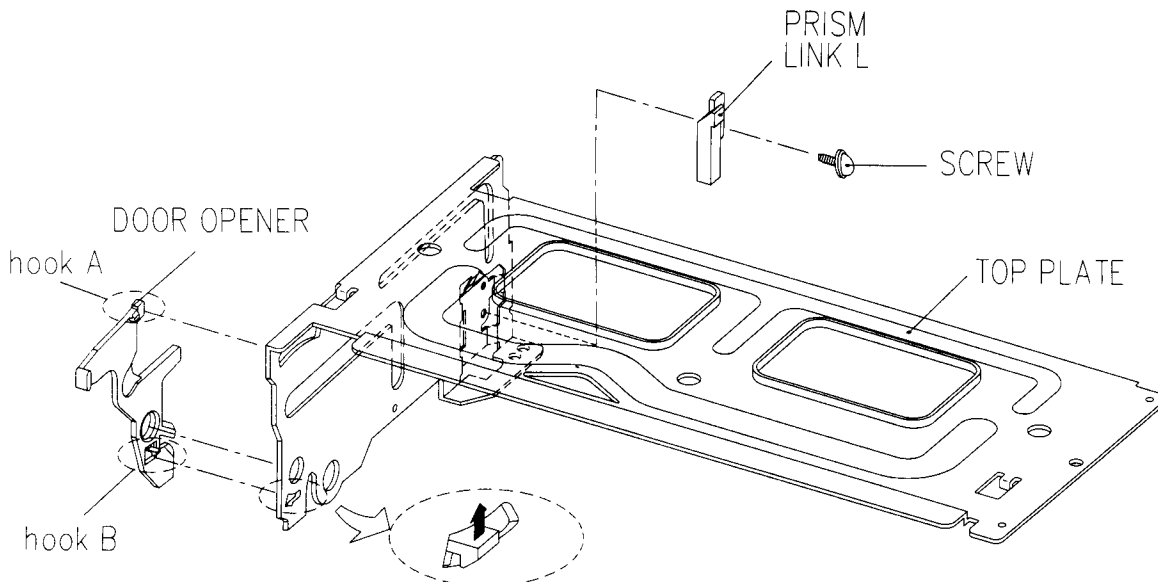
DISASSEMBLY OF THE TOP PLATE
